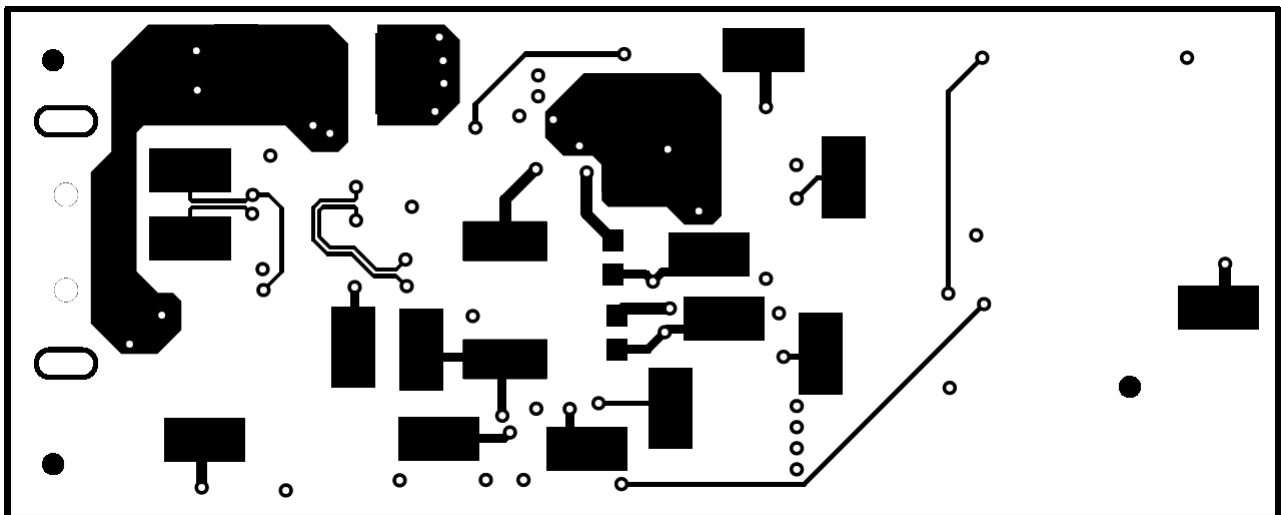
DEM-PCM2912A EVM Board Layout—Bottom Side
